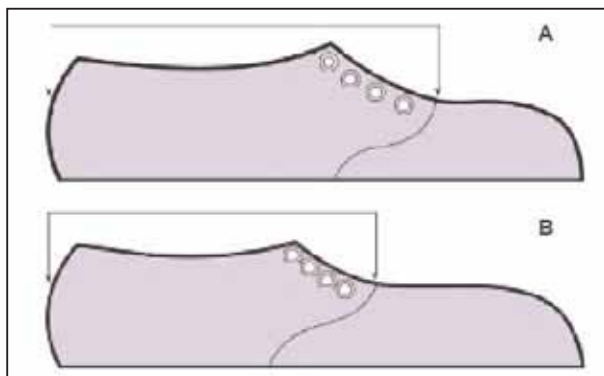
Outline drawings to demonstrate short and long vamp sections.
